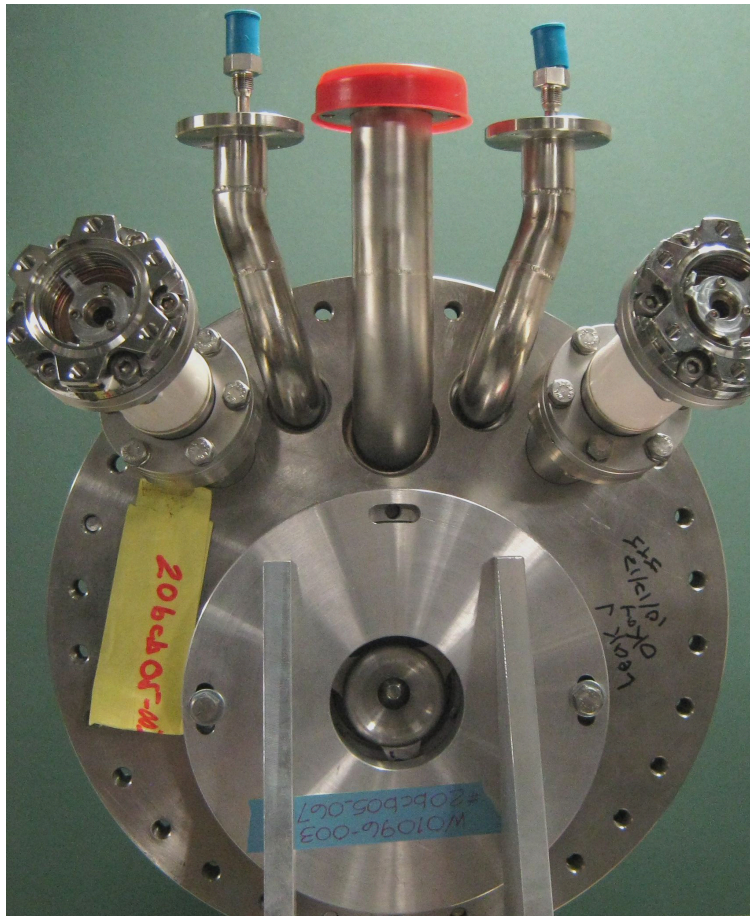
13.25" flange mounted to maintenance cart. RFQ electrodes are mounted to the far side.
